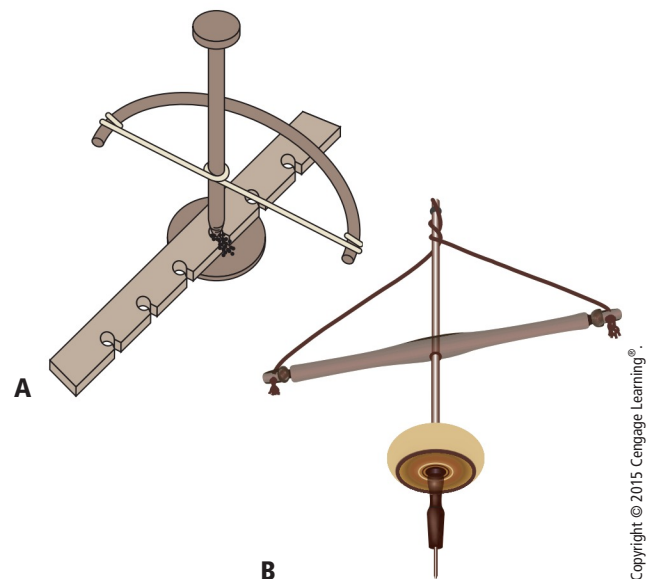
Examples of the earliest hand-powered machine tools. (A) The bow drill; and (B) the pump drill.
